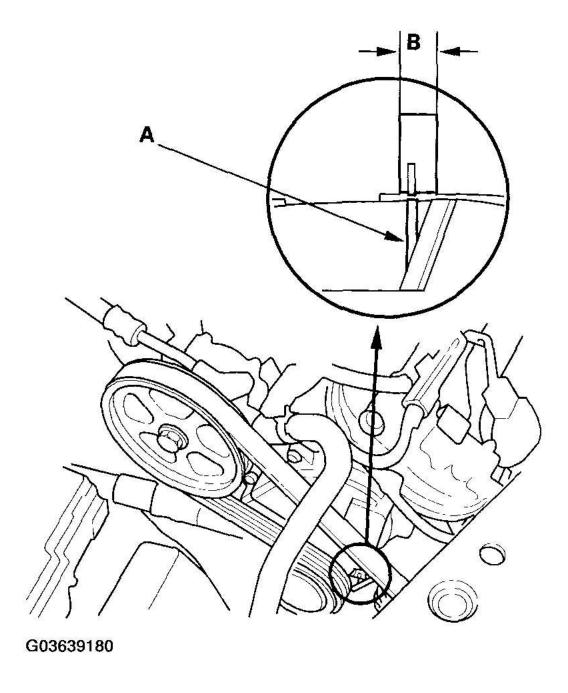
Checking Auto-Tensioner Is Within Standard Range Courtesy of AMERICAN HONDA MOTOR CO., INC.
